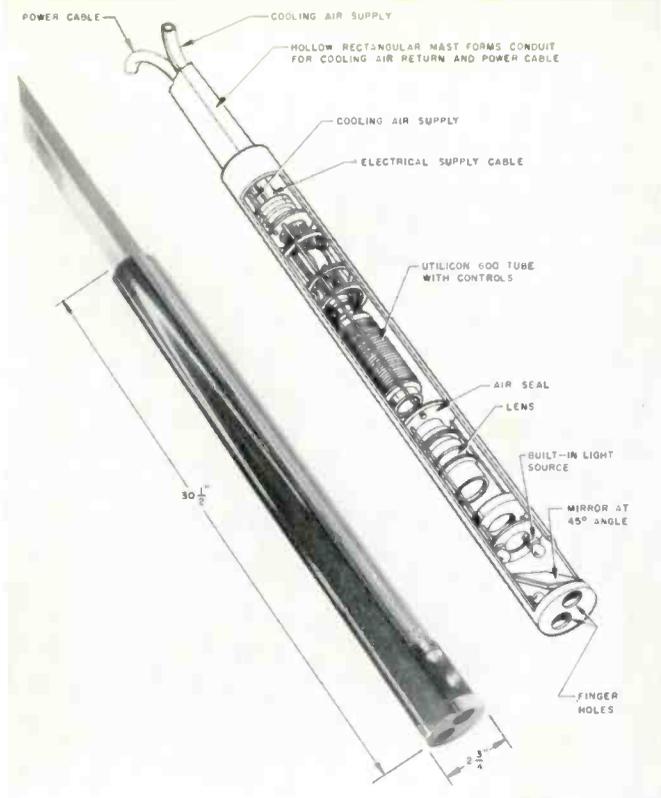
Diamond Reactor Tube Inspection Camera, just  $2\frac{3}{4}$ " in diameter and  $30\frac{1}{2}$ " long, is in daily use inspecting reactor tube welds. Camera must operate inside tubes only three inches in inside diameter.
